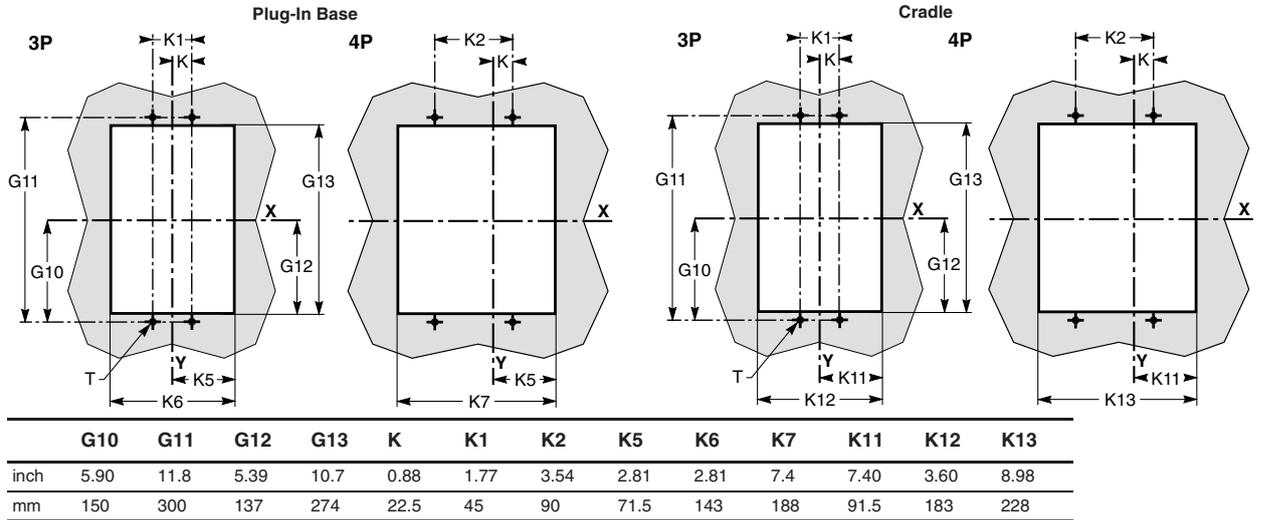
PowerPact L-Frame Circuit Breaker Mounting on Rails (Plug-In Base or Cradle)
